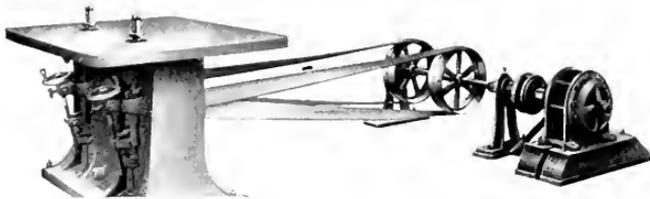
Double Spindle Shaper Driven by a Single Motor Belted to the Spindles
